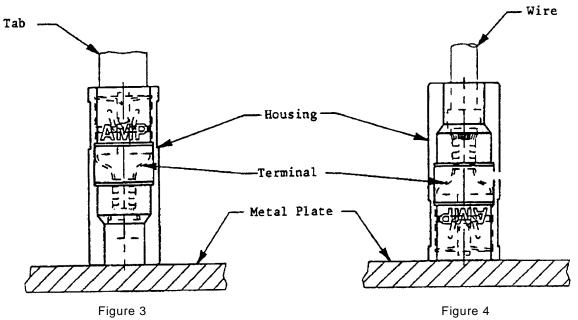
Metal Plate Test Fixture Dielectric Condition C
